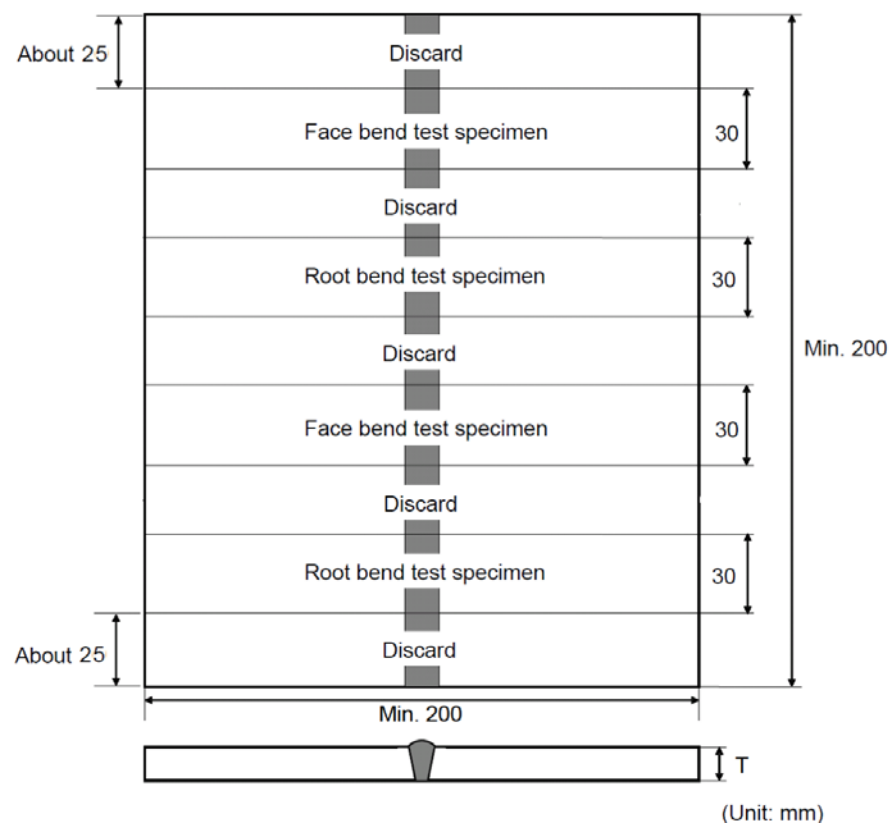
Dimensions and types of test assembly for butt welds ($T < 12\text{mm}$)
